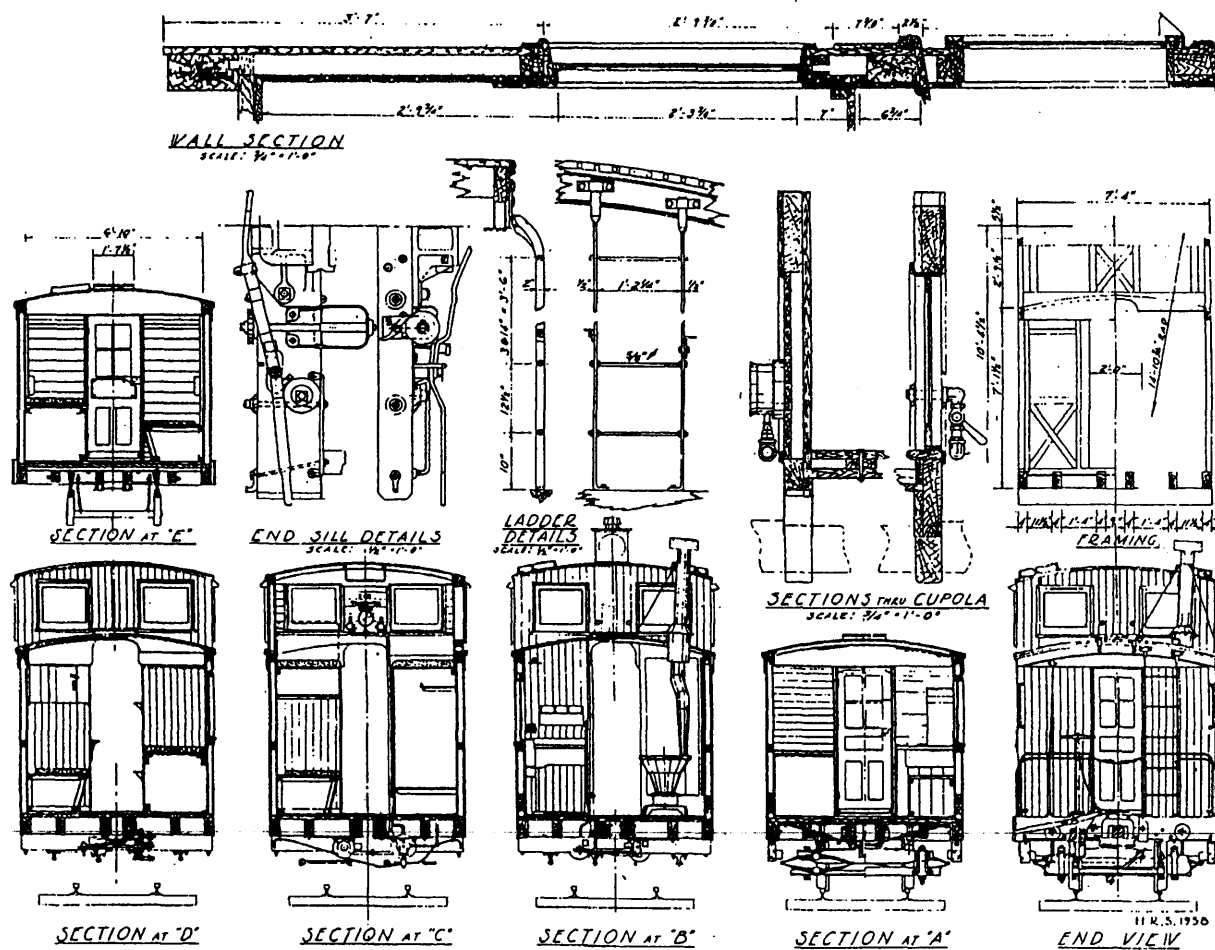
Elevations and Plans for D&RGW Caboose No. 0578
